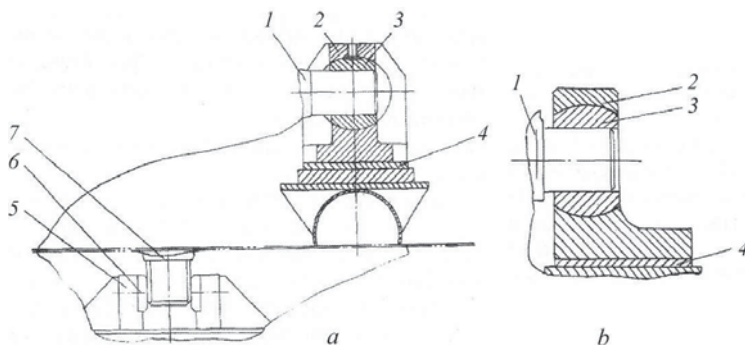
Front (*a*) and rear (*b*) supports for attaching the D050 engine to the frame [15]:
